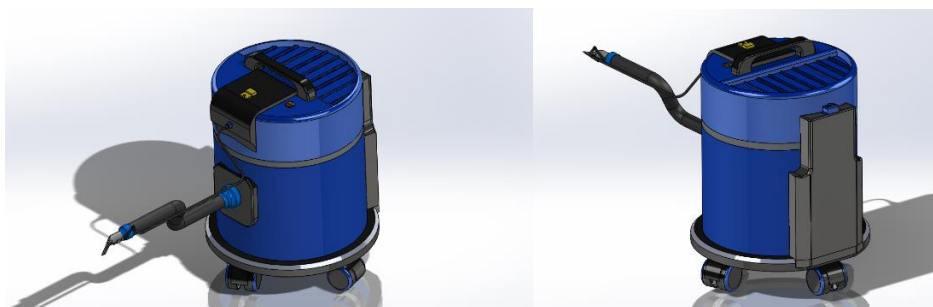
Assembly View of Multi-Sprayer Ash Vacuum
